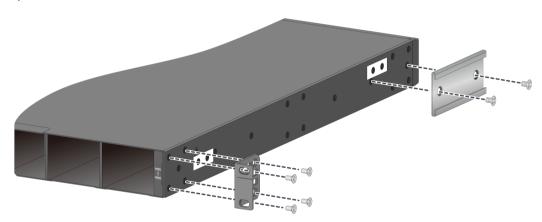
Attaching the mounting brackets and chassis rails to an HPE 5944 48XGT 6QS28 switch (mounting brackets installed near the power supply side, rack mounting rail kit A or B)
